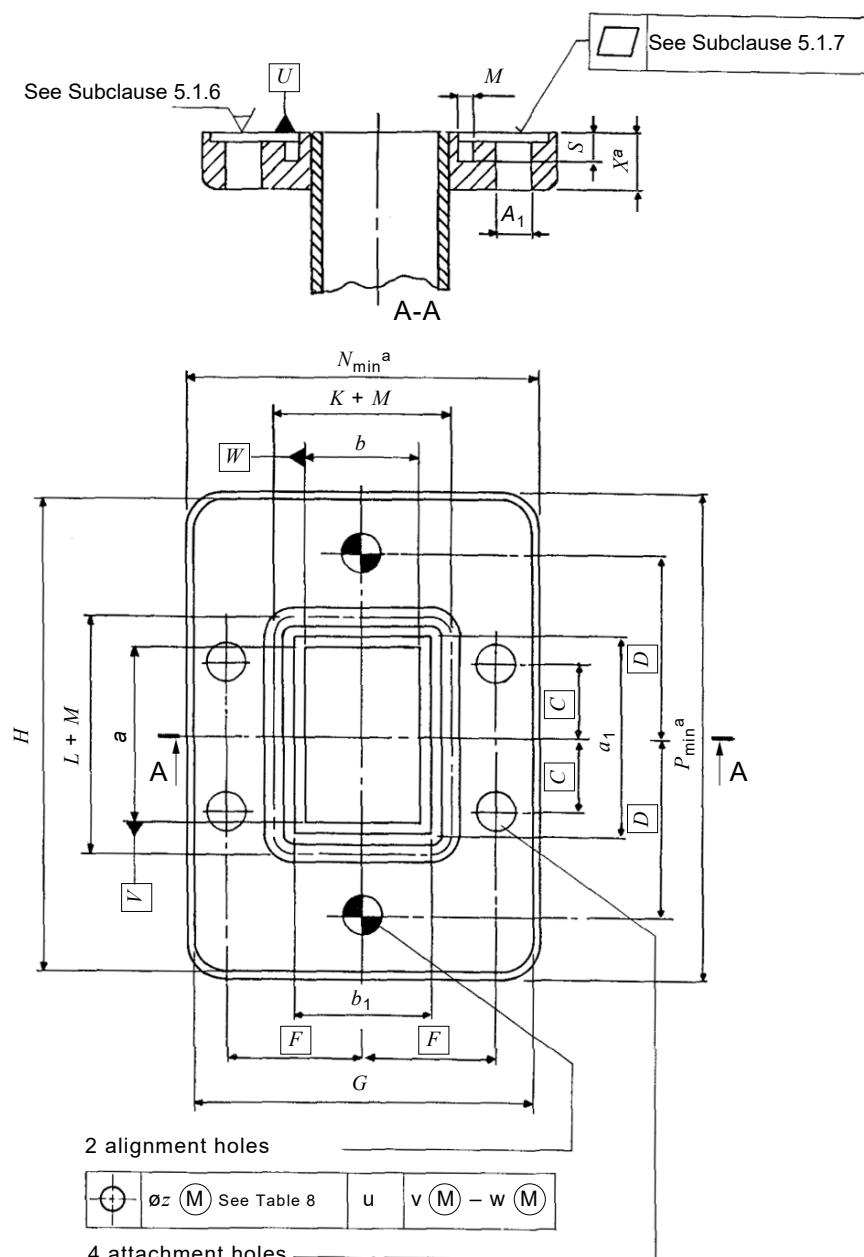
Flange type D: 60154 IEC-PDR 48 – 100
